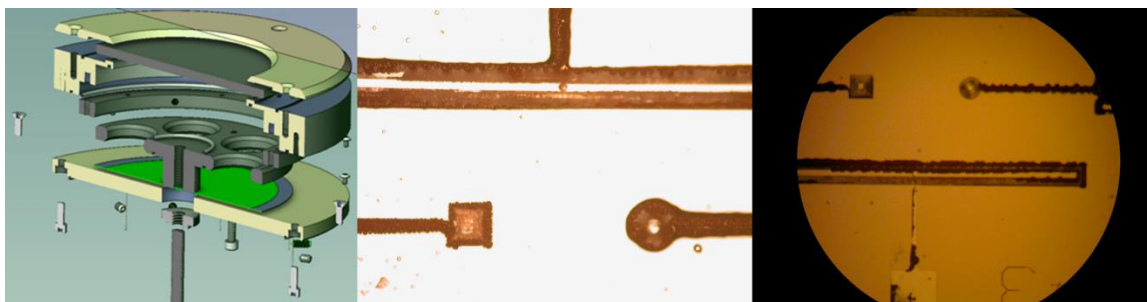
Left, RCE wafer fixture. Center and Right, examples of over and underplating planar coils.
